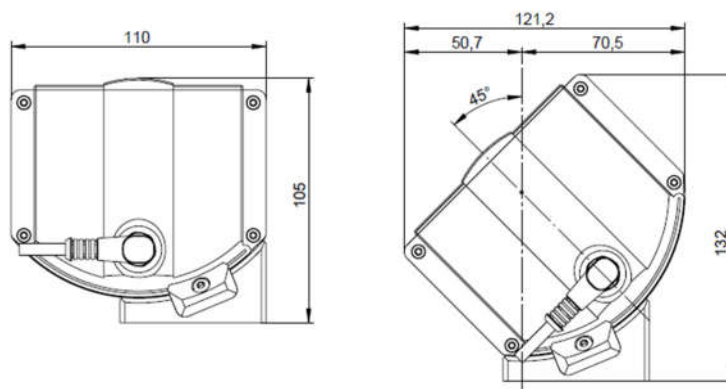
Laser device with swivel mount – top view (dimensions in mm)
